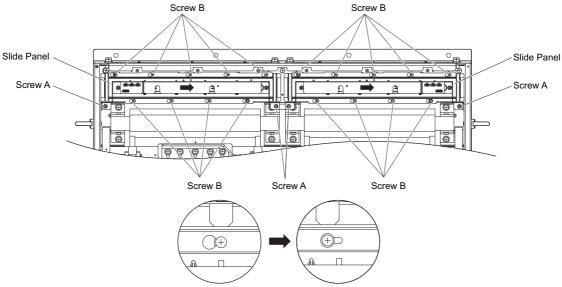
Removing the Fan Unit: 4A0930 and 4A1200
